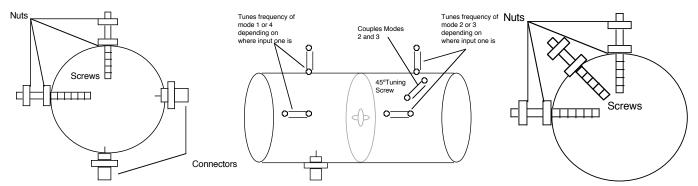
Design of the canonical filter; front view of first can (left) side view (center) and front view of second can (right)
